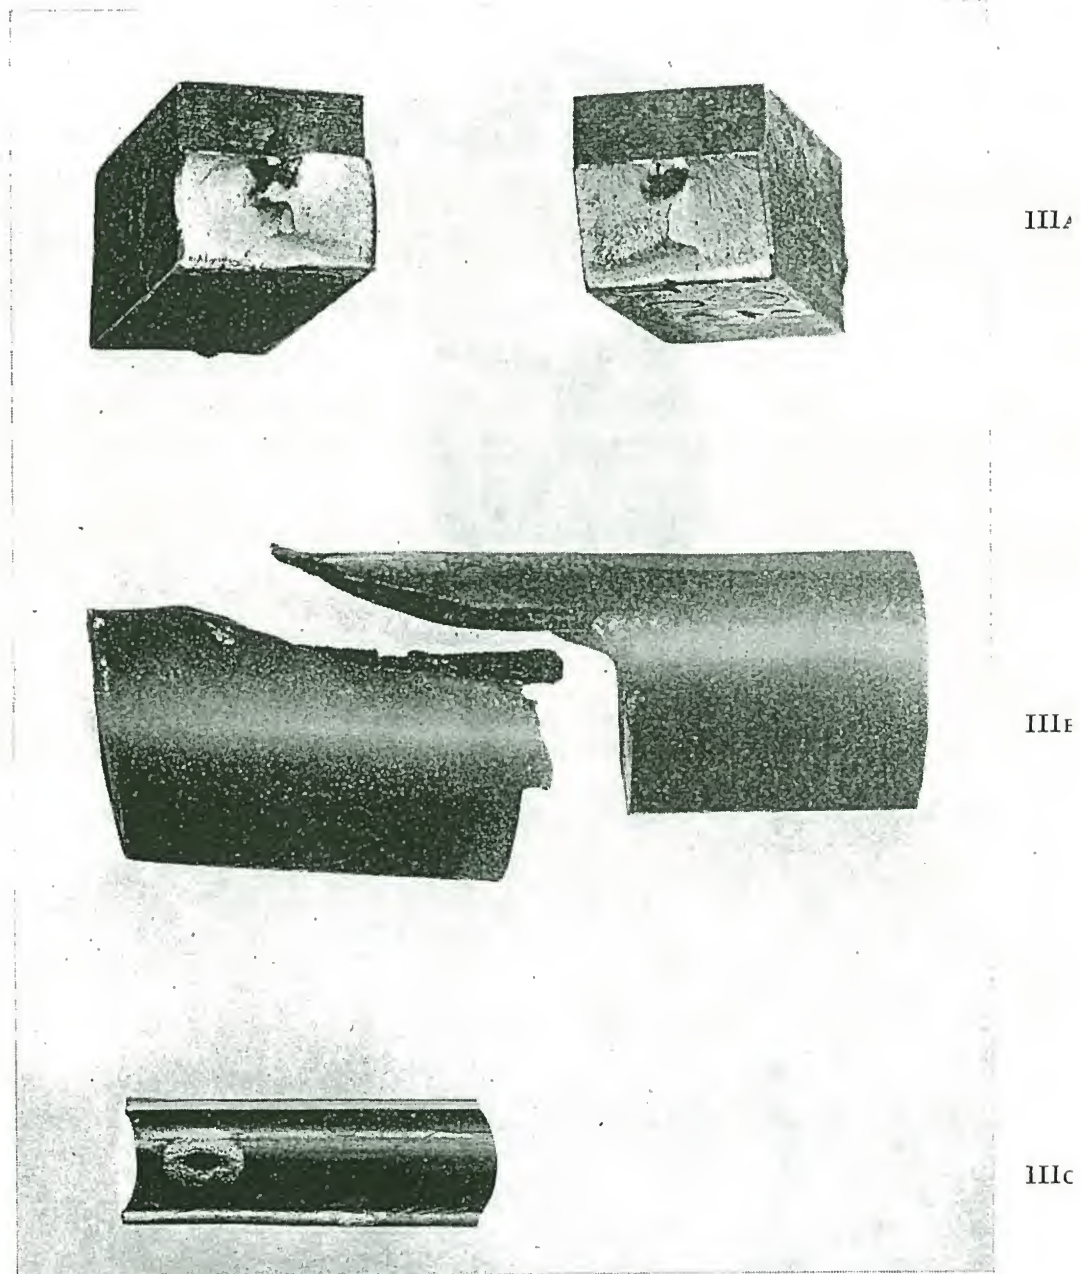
PLATE IIIa. TWO FRACTURES OF STEEL BAR SHOWING "PIPE"
